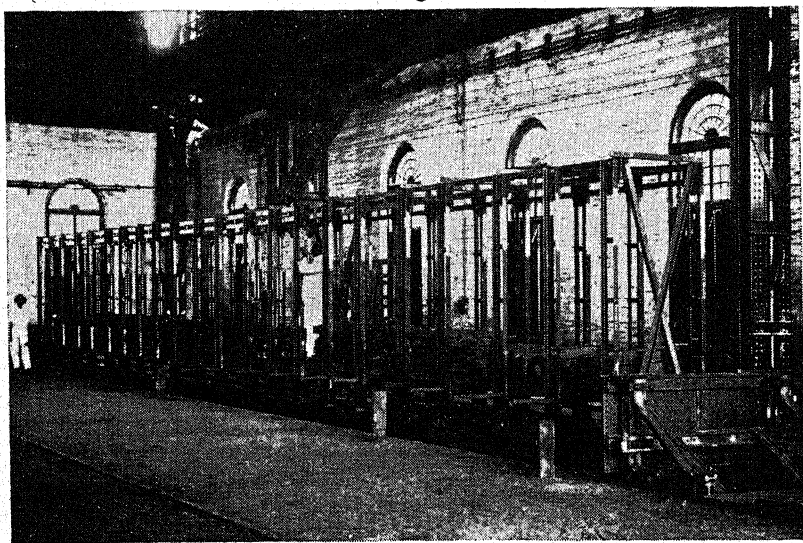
Vierendeel girder frame member of coach set up for testing.
